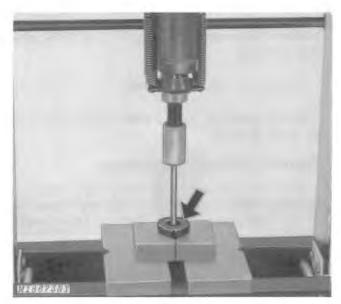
Removing Bearing From Impeller Press the bearing from the impeller, Fig. 9.
